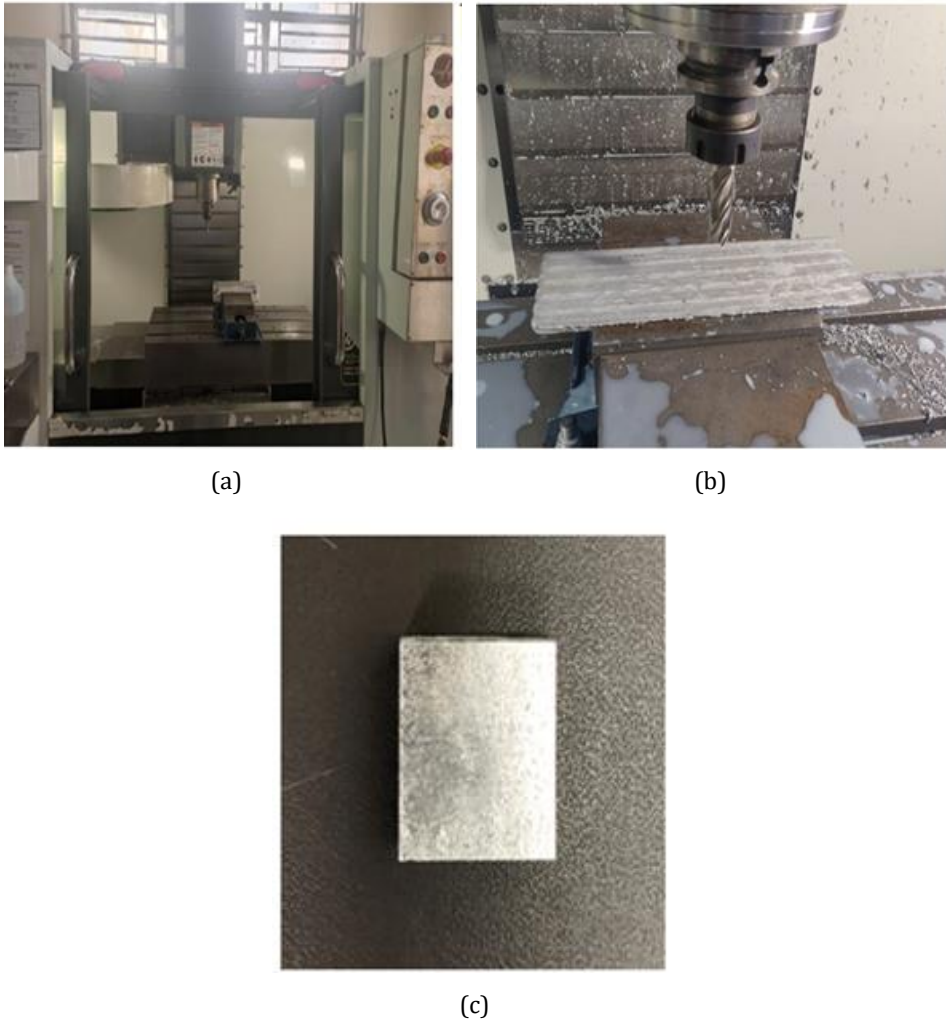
(a) CNC machining set up; (b) End mill tool with smooth surface; (c) Test specimen
